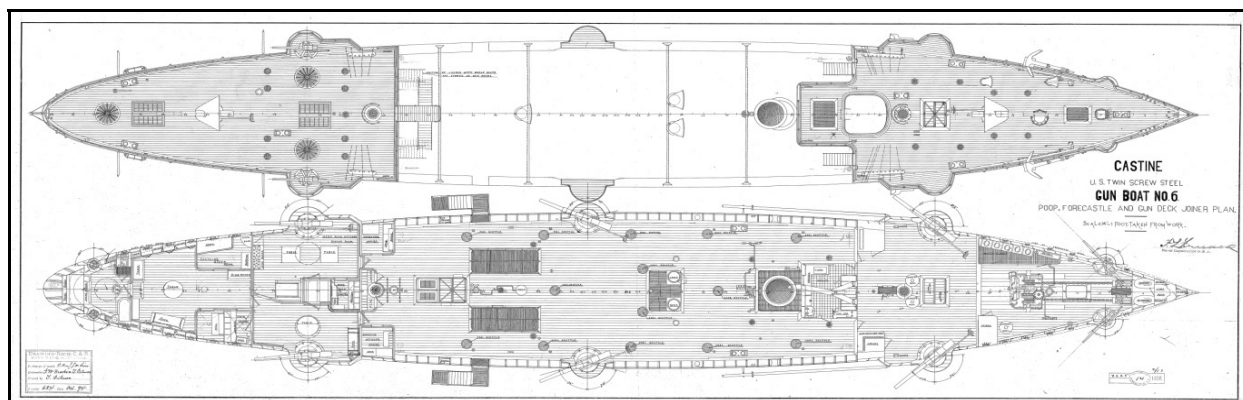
USS *Castine* deck plan (U.S. Bureau of Ships 1894).
